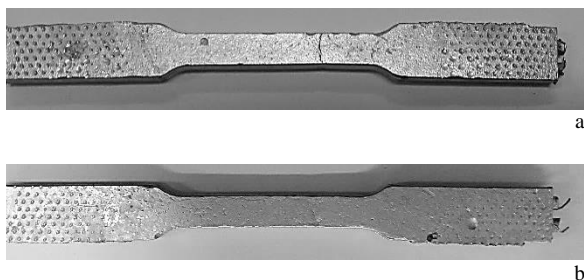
Standard tensile test specimen a) before heal b) after heal
